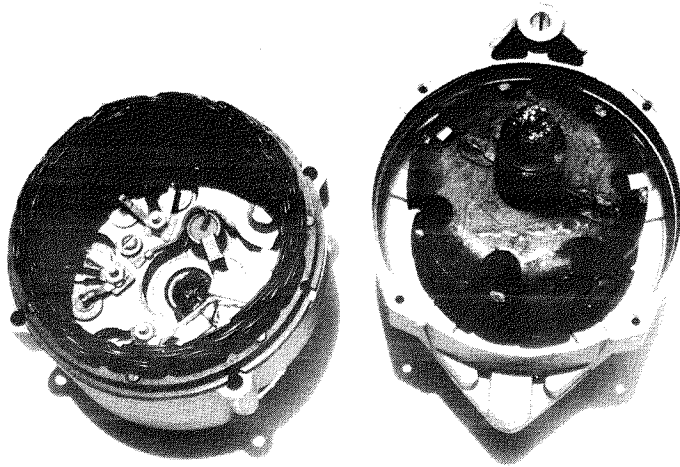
The Delco-Remy alternator housing is disassembled by removing four bolts. The high voltage core can then be installed.
